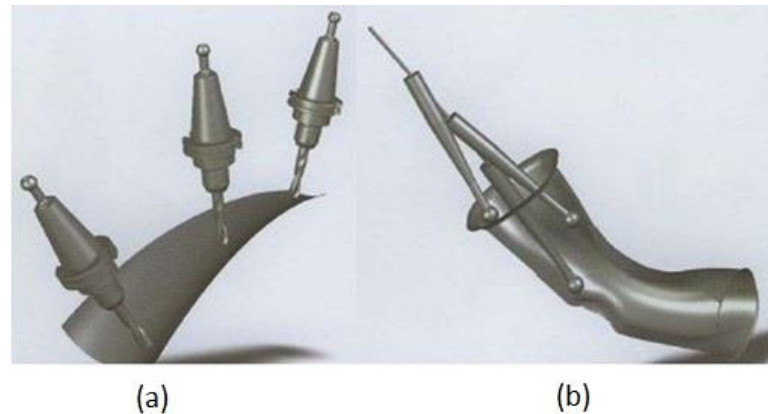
Tool Axis Control, while the part (a) can be manufacture on both a Head-Head and Head-Table machine configuration, parts with a geometry like the one on (b) are manufactured by machines with Head-Head configuration [9]
